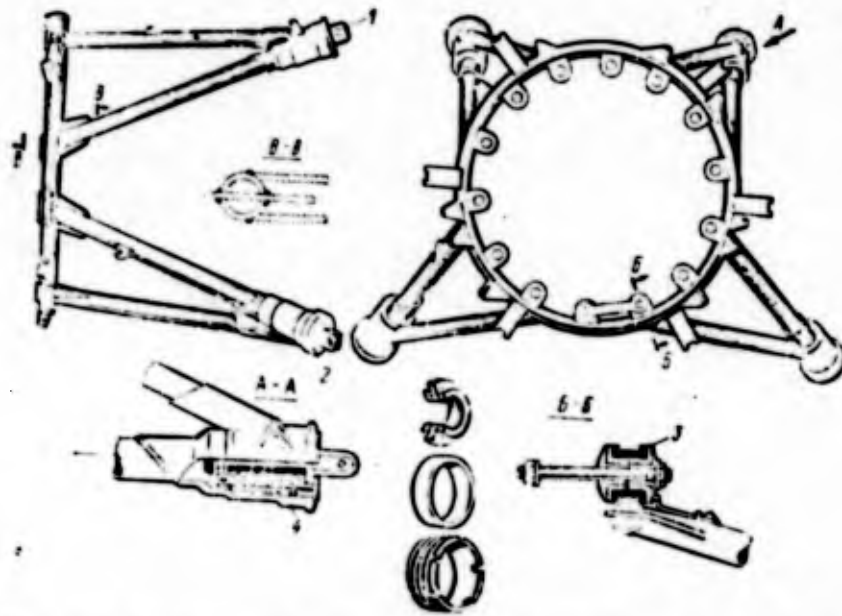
Design of the engine mount of a radial engine: 1 - upper points with shock absorbers; 2 - lower points with shock absorbers; 3 - bushing for attaching the engine to the engine mount; 4 - shock absorber of the sub-engine mount.
